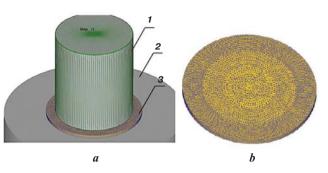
A computer model of the die (a) and blank for drawing operation with the finite element grid (b): *I* - puncheon; 2 - die; 3 - blank
